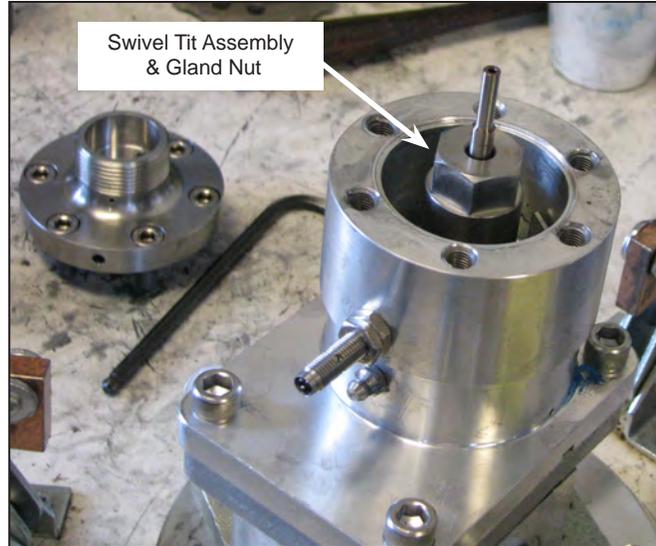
Swivel tit assembly/gland nut installed on the thru-shaft and torqued to 50 Ft lbs.
